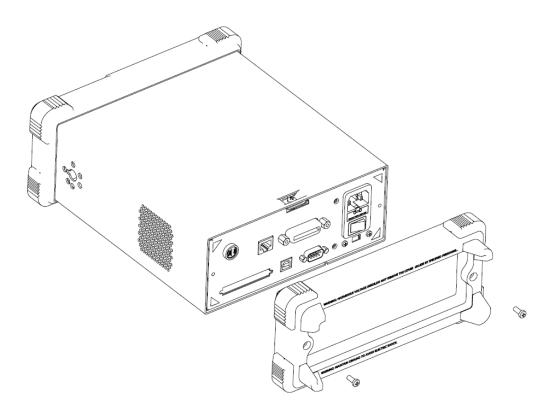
The Schematic of Disassembling and Assembling Rear Panel
